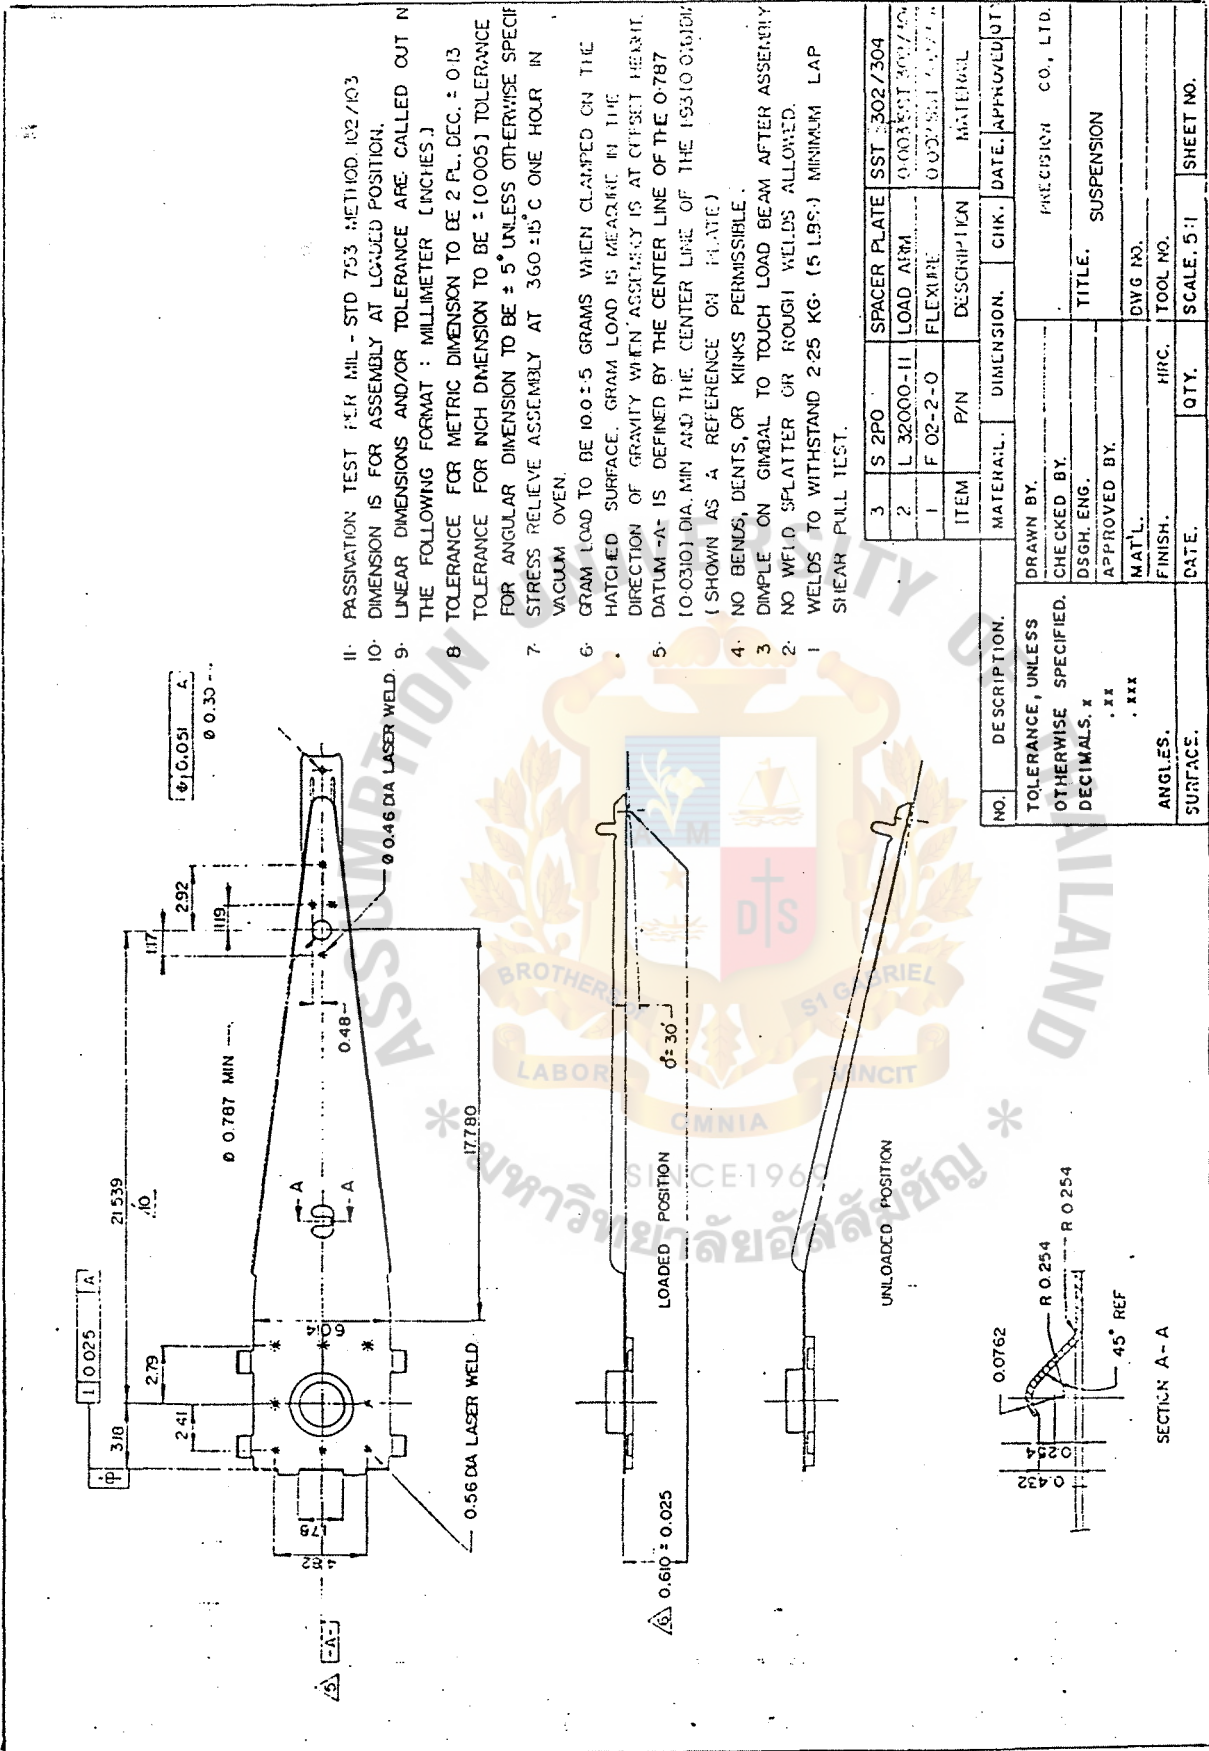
Sample of Designed Product Assembly parts (CAD process)
